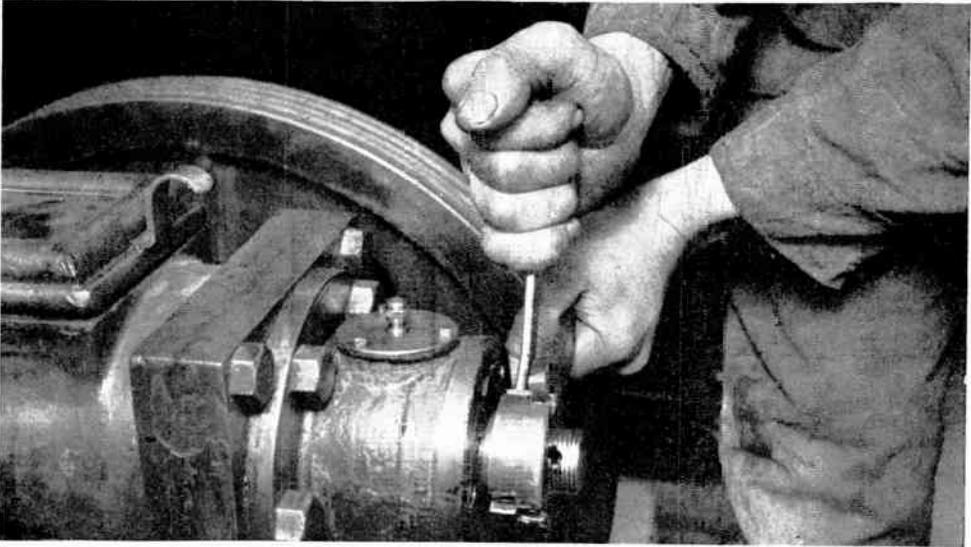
TAKING UP END PLAY IN THE WORM BY ADJUSTING THE THRUST BEARING.
